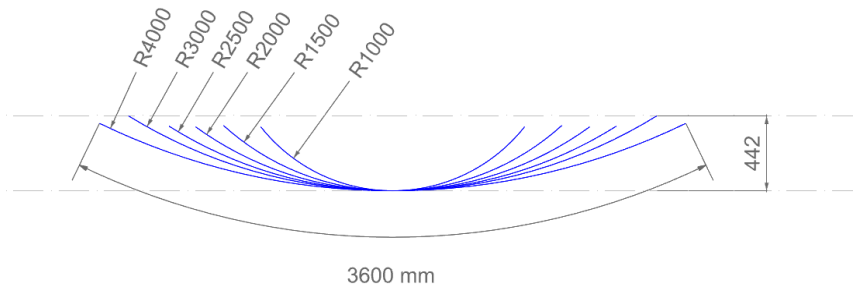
Machine bending radii. Oven for large lengths w/shallower geometries.
